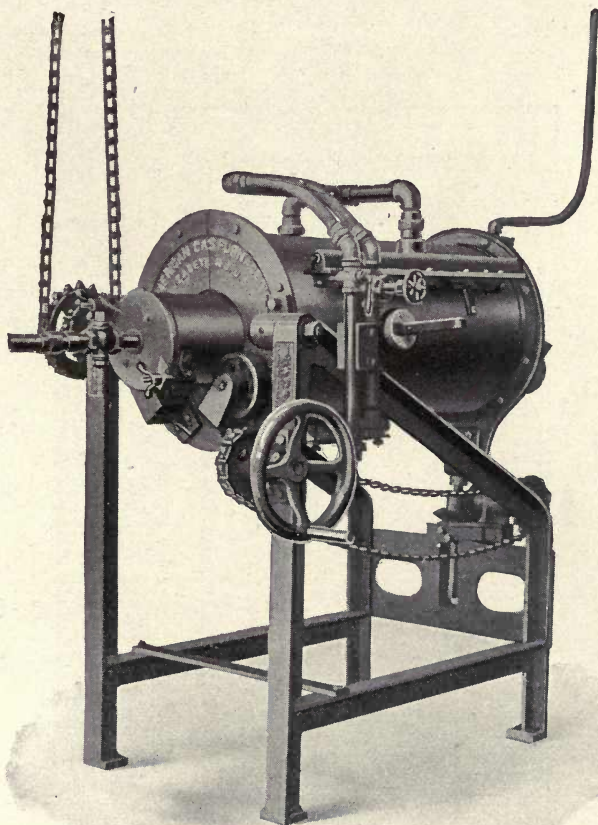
American Gas Furnace Co.'s Carburizing Machine.
